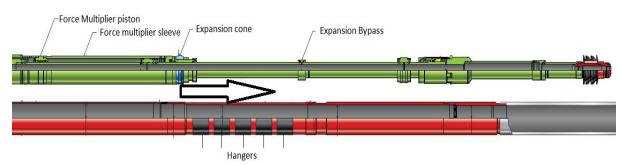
Shows where the lower part of the running tool is located inside the liner hanger. The expansion cone will be pushed by hydraulic forces, expand the hangers, and attach it to the casing which is located on the outside. The plug on the running tool will not be attached to the running tool when the liner is set, it is just included to give a better overview of the setup. [42]
